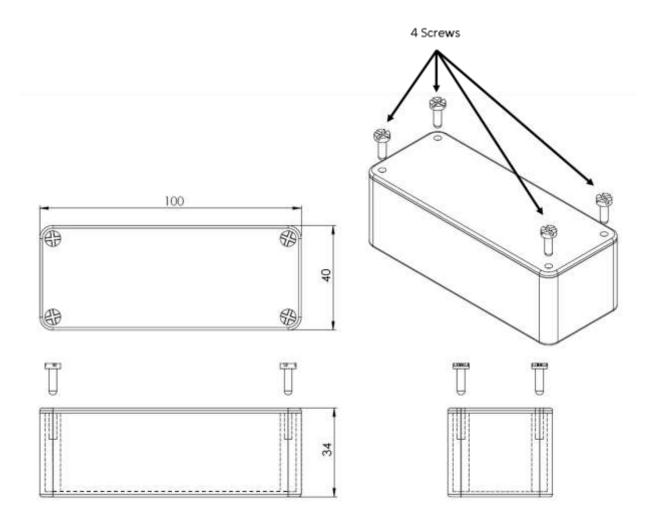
Plastic Box and Lid Assembly (Dimensions in mm)
